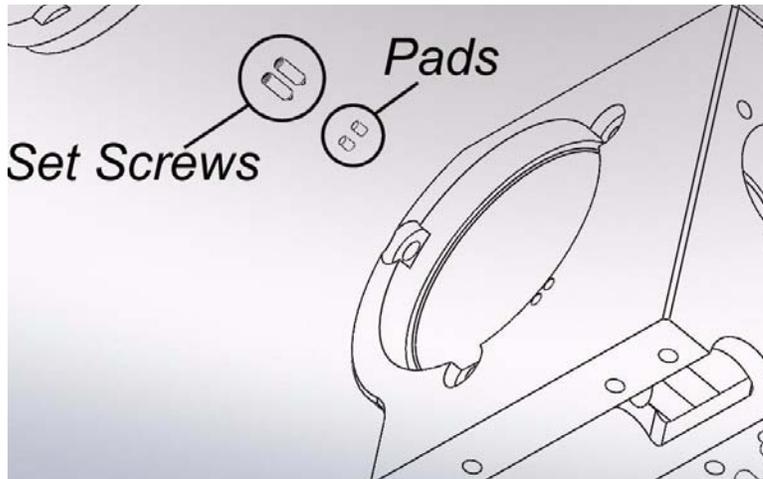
Verify pad placement, there is no need to remove the clamping pads.
